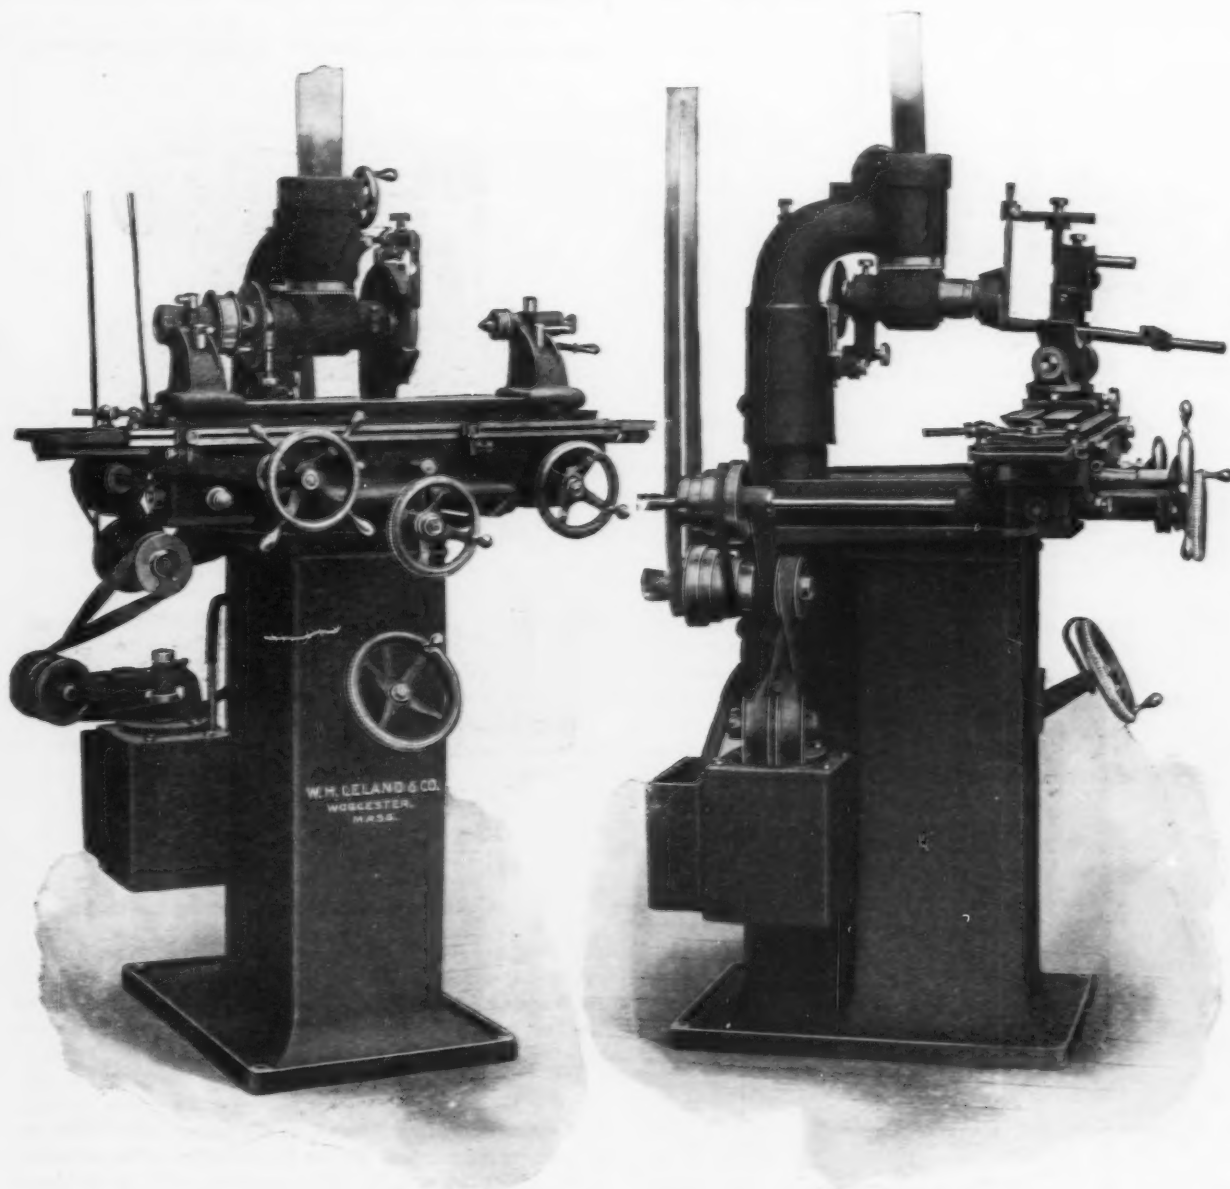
The New Leland Universal Toolroom and Commercial Grinding Machine.
